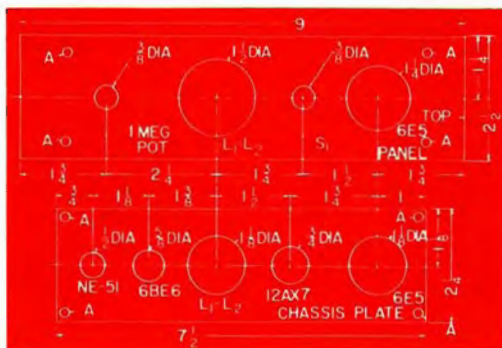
PANEL AND CHASSIS PARTS LAYOUT used for this model. Small holes for socket and terminal strip hardware are not shown and should be located from those parts.
